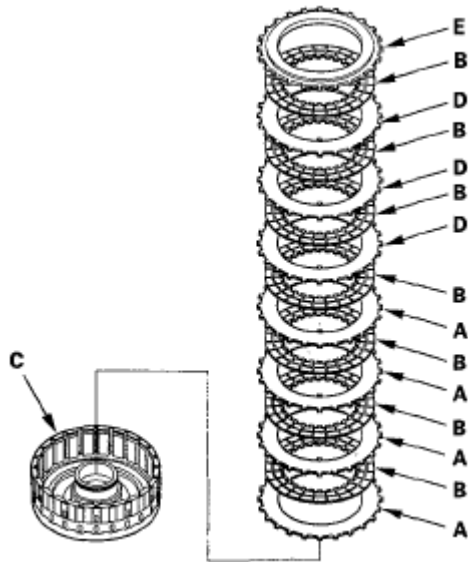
Identifying Flat-Plates, Discs, 2Nd Clutch Drum, And Wave-Plates
